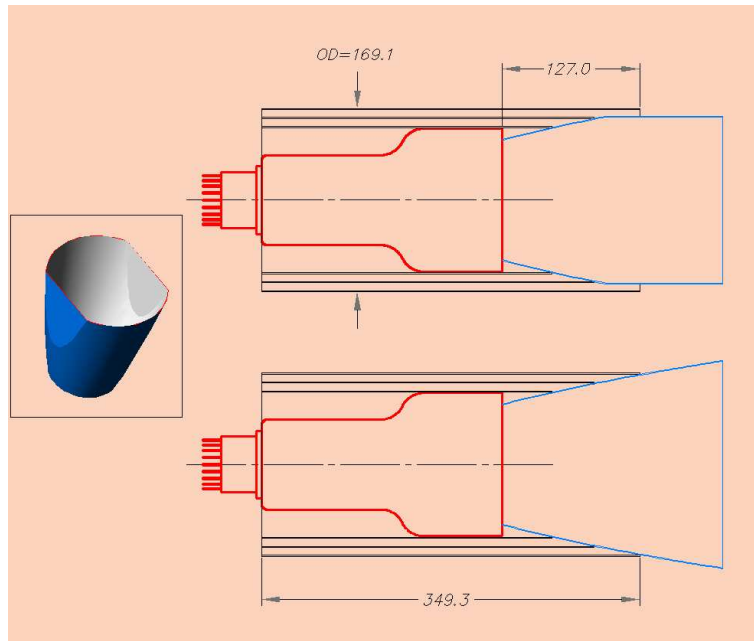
Assembly of a photomultiplier tube with a Winston Cone magnetic shield.
